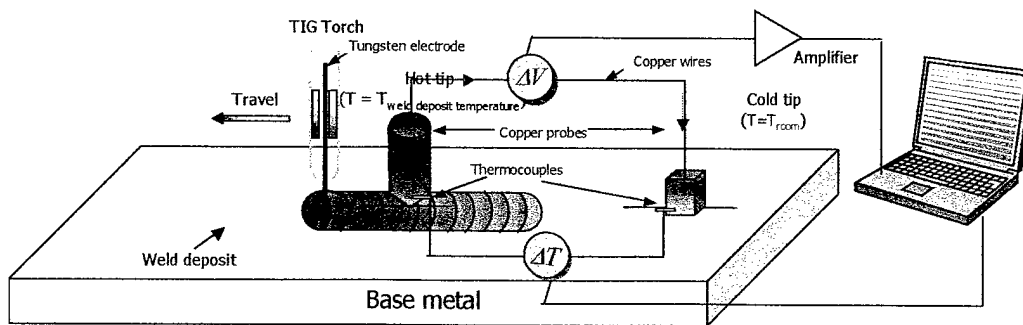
Schematic setup used for TEP measurement on cooling directly after weld solidification.
